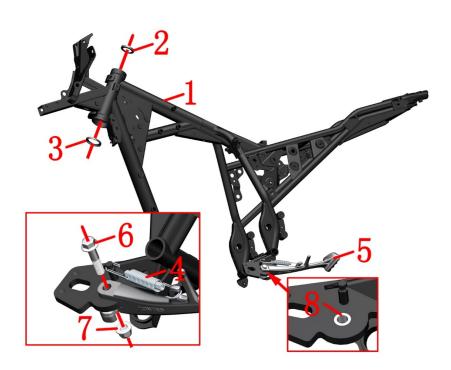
FR	AME&ELECTRONIC	Frame, Side support	CHK	40)
